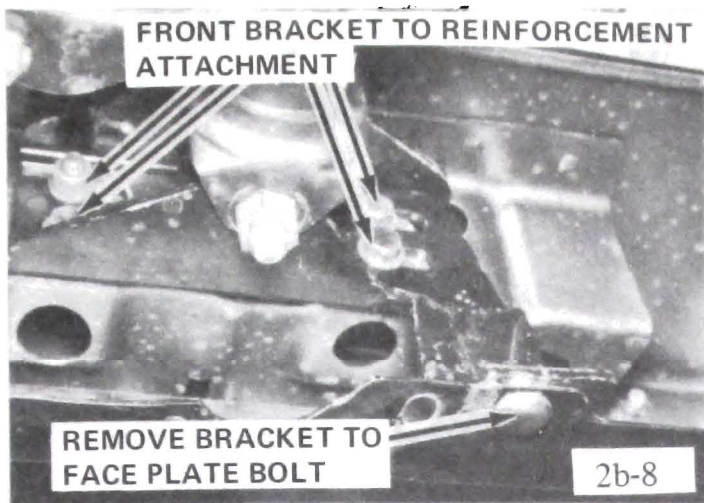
B-8 Faceplate to Unit Bracket Bolt "A" Series
